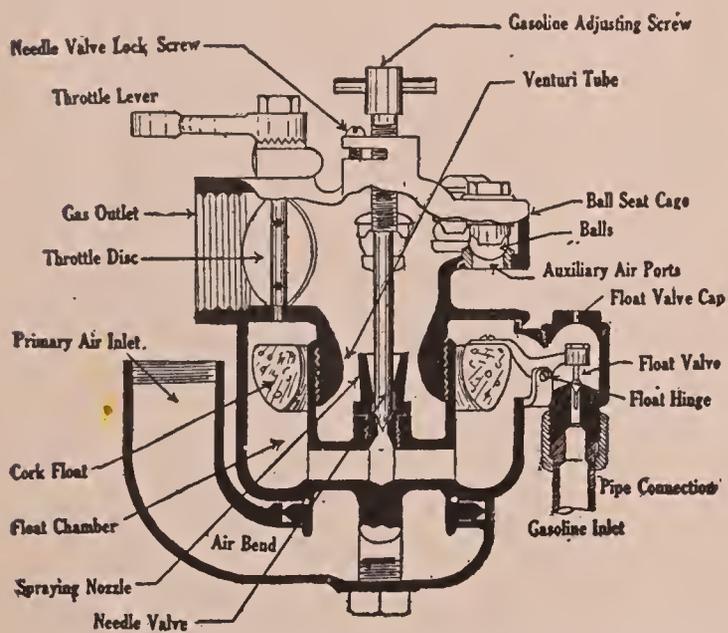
Kingston carburetor in section, showing few parts and their simplicity—note ball air valves.
